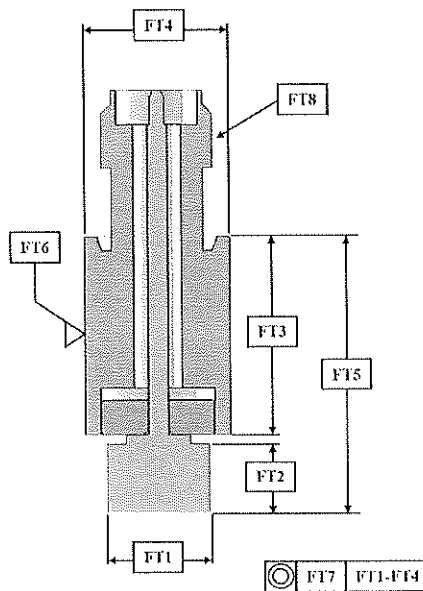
Details of dimensional inspection of the BPM Feedthrough
